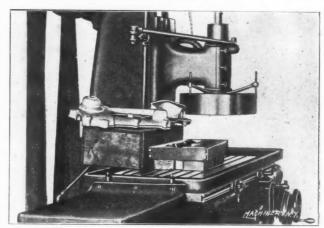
The Acme of Simplicity in Fixture Making. Face Grinding the Steering Gear Casing
